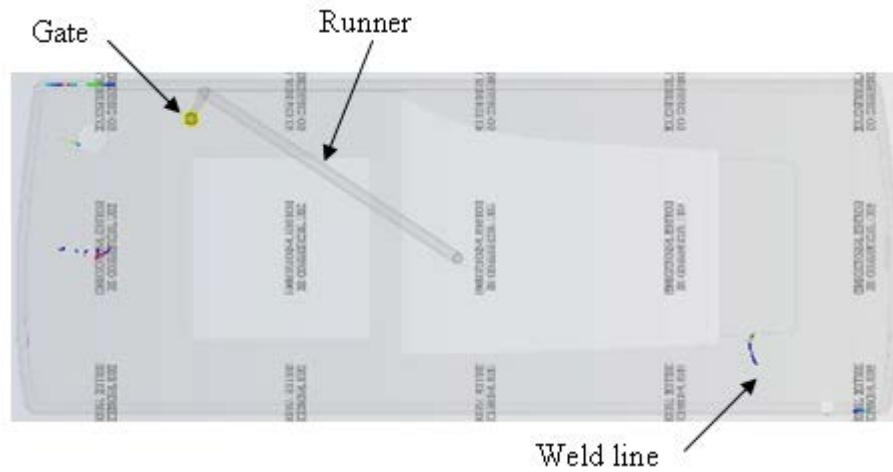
Weld lines produced at the melt temperature of 230°C
